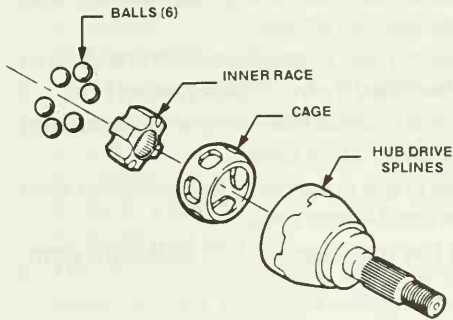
An exploded view of an outboard joint. (Pontiac Motor Division of General Motors Corporation)
